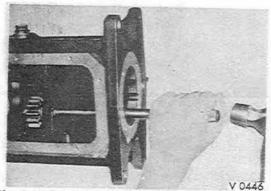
Removing the reverse idle gear shaft from the transmission case.
